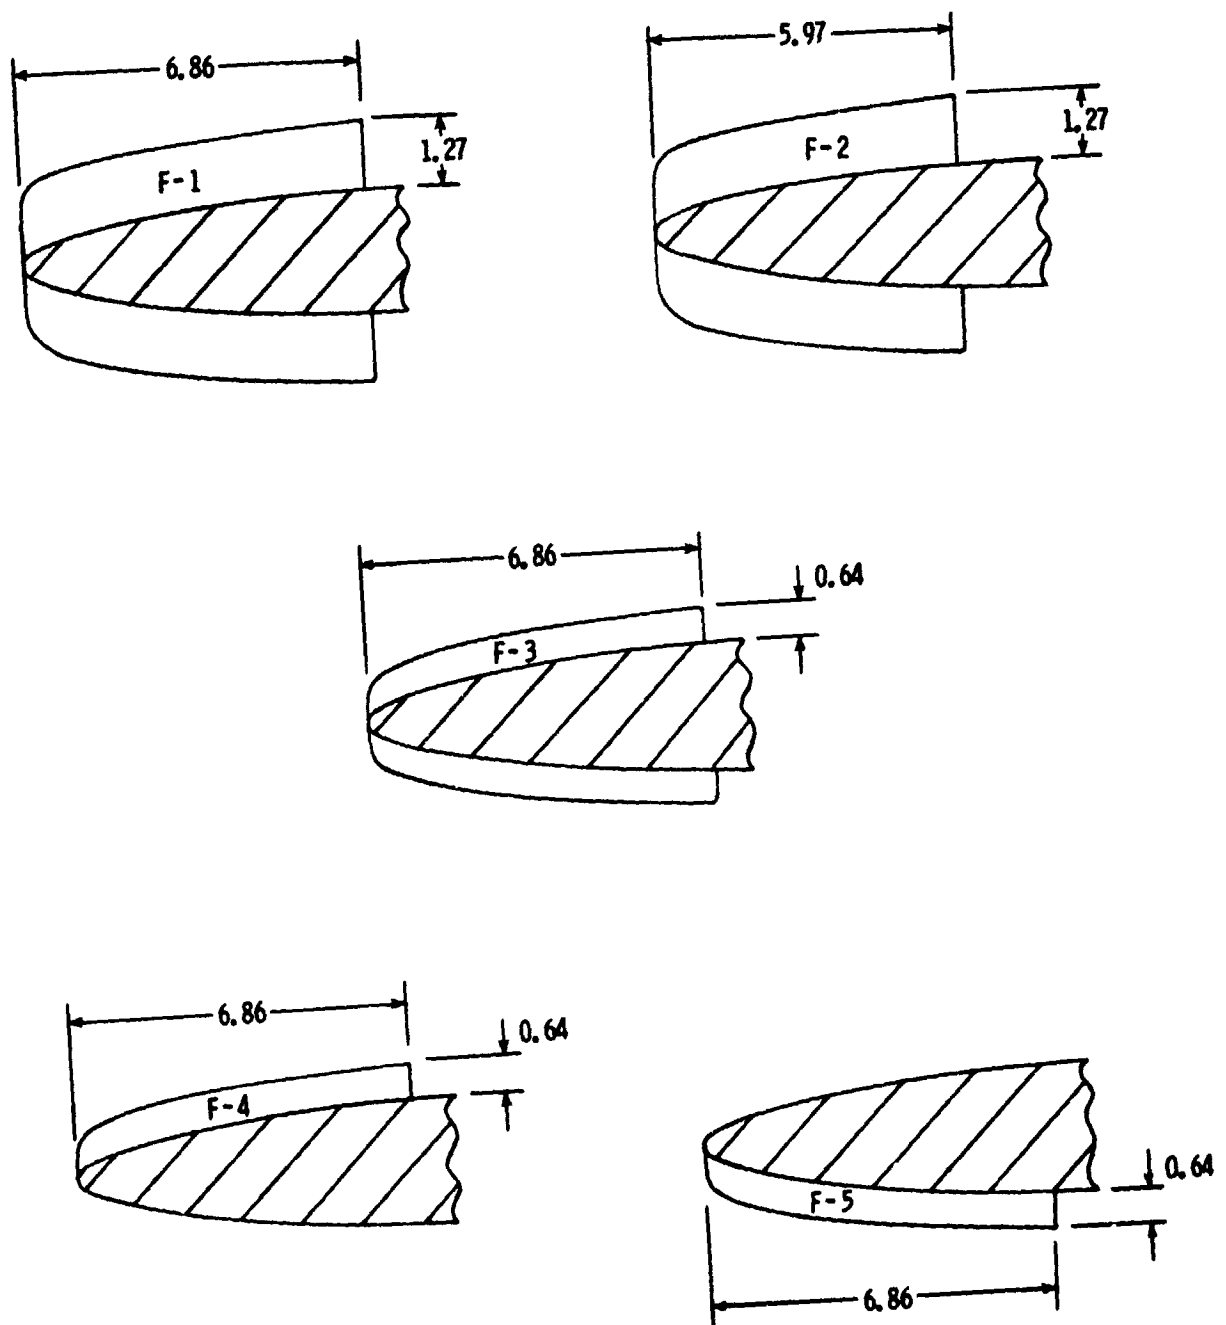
Drawing of fences tested. Dimensions in centimeters.
